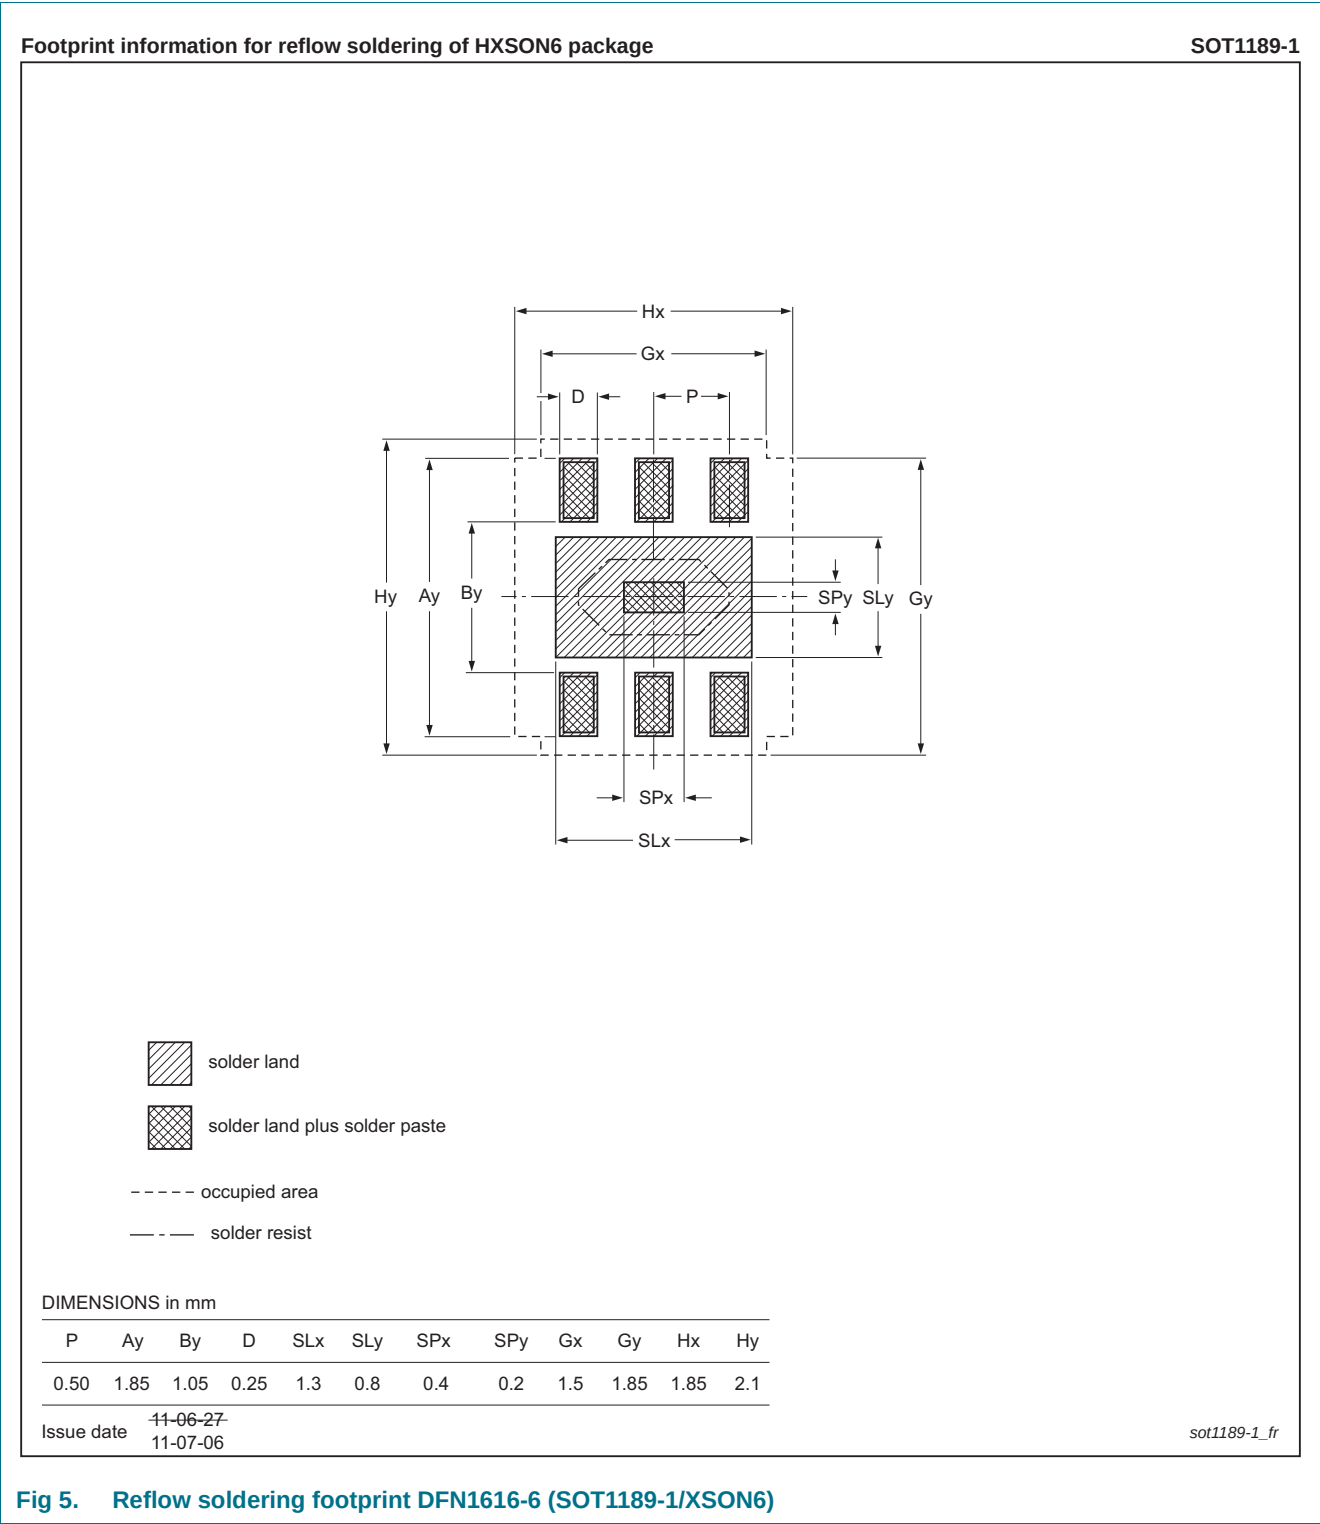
Reflow soldering footprint DFN1616-6 (SOT1189-1/XSON6)
